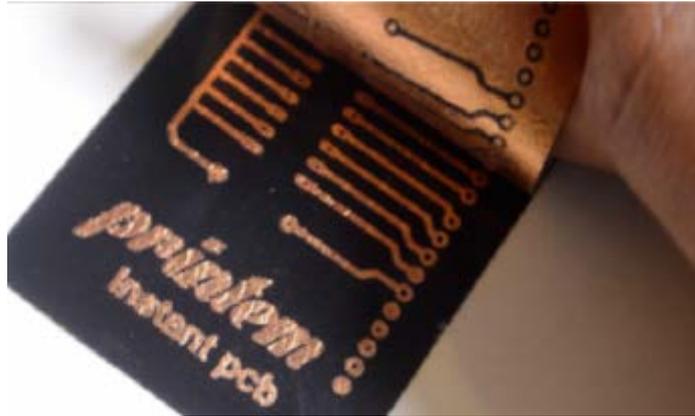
Printed and foldable PCB on Printem film. (Source: "Printem" [9], 2015)
